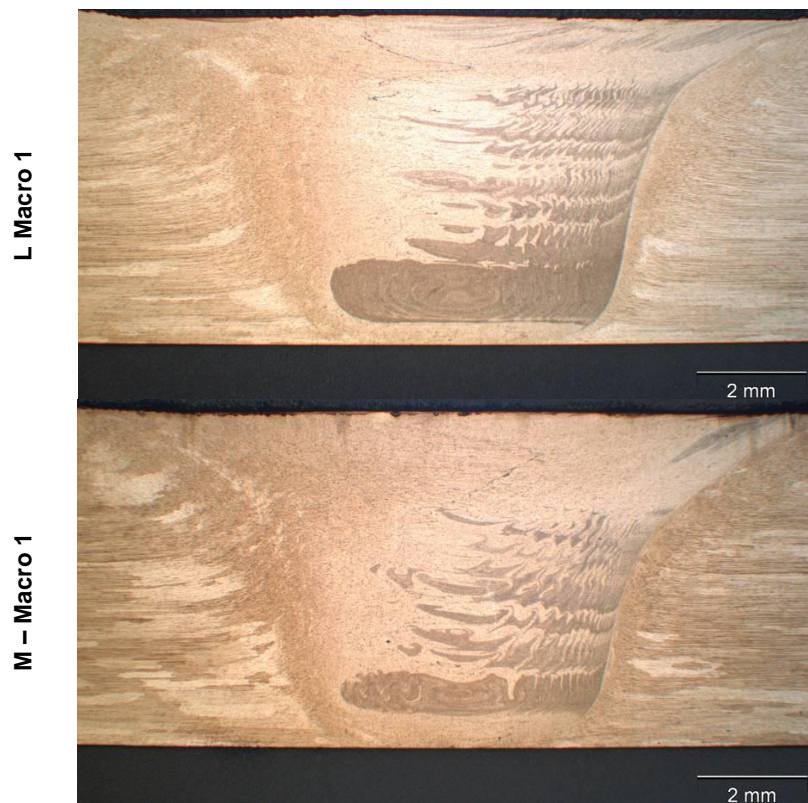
20. OM Macrographs for 6082-T651 welded samples
